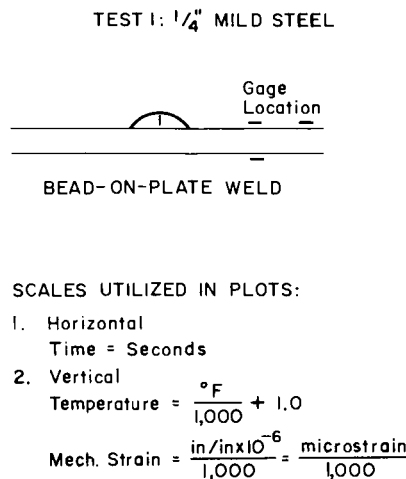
Weld cross-section and gage location for Test 1, mild steel.
